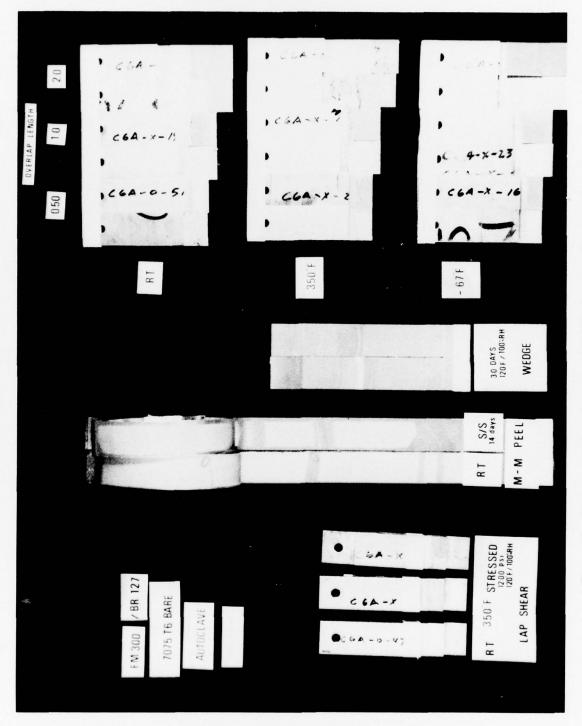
Specimen Failure Surfaces—FM 300, PasaJell 105, Autoclave Bonds
